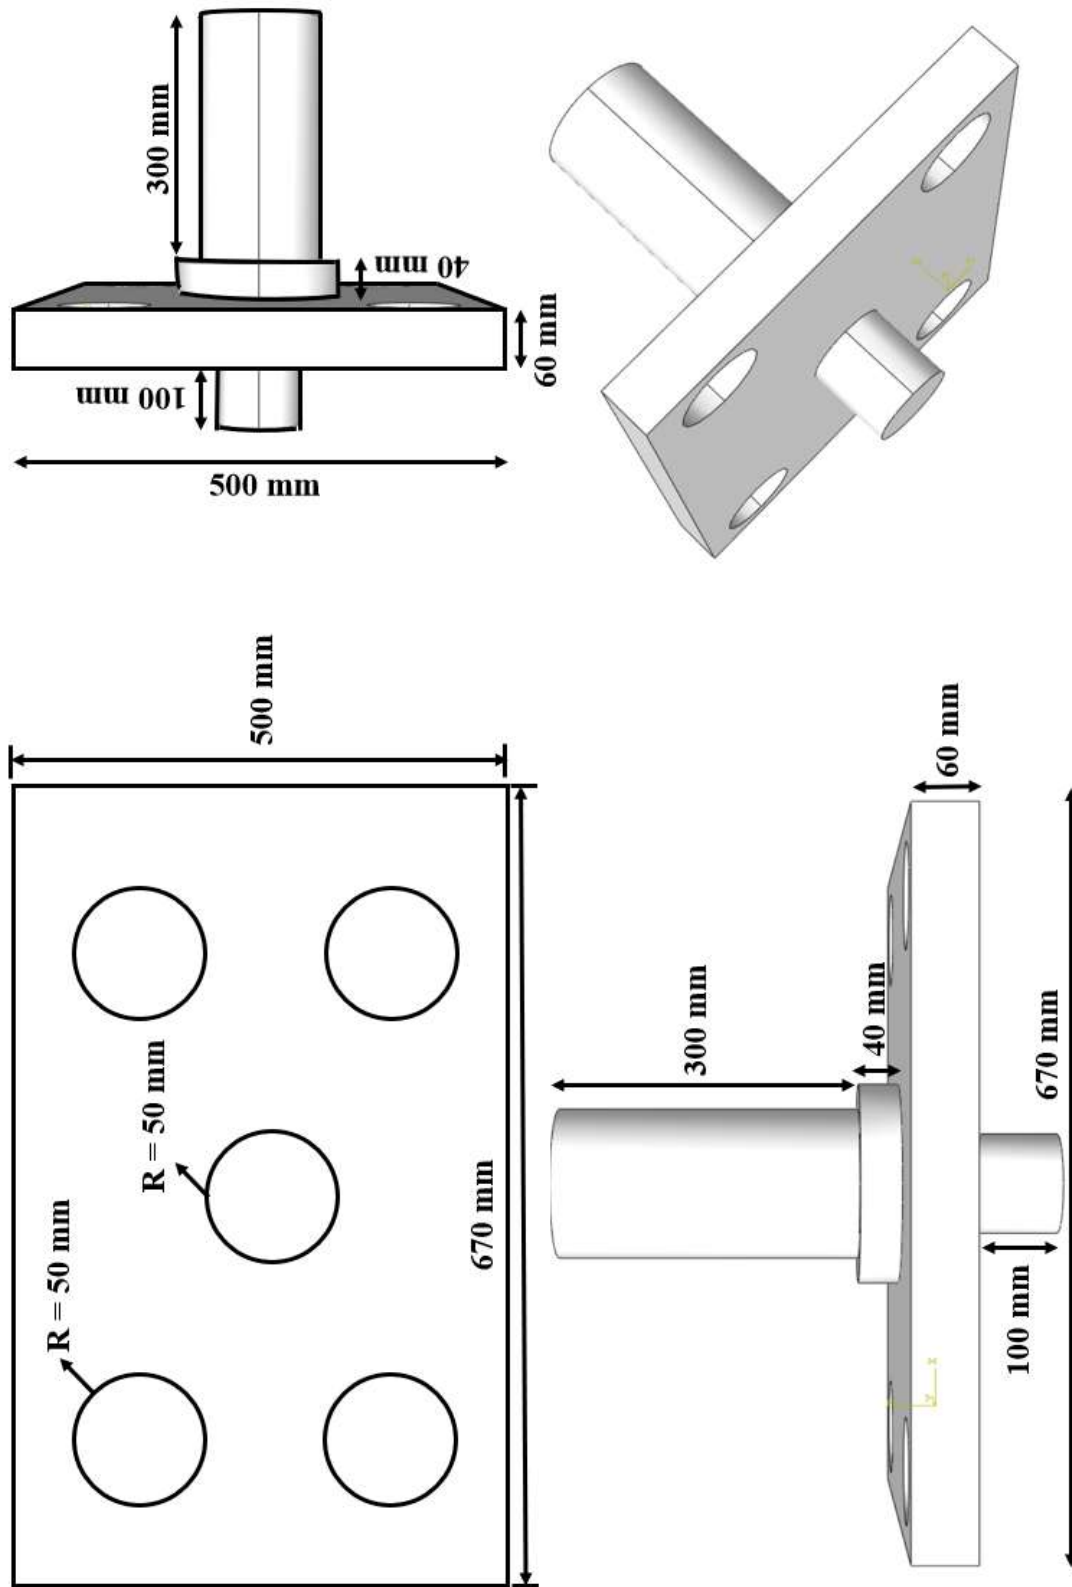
Drawing detail of assembly of upper cylinder with supporting plate
